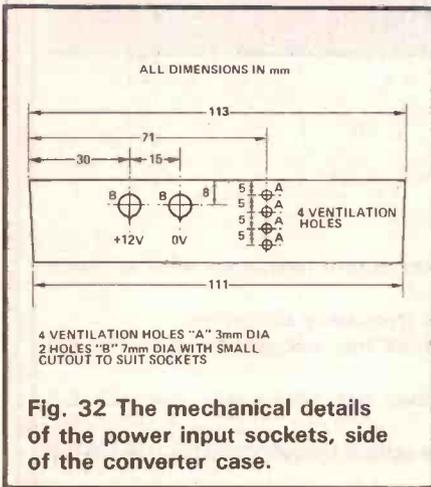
The mechanical details of the power input sockets, side of the converter case.
